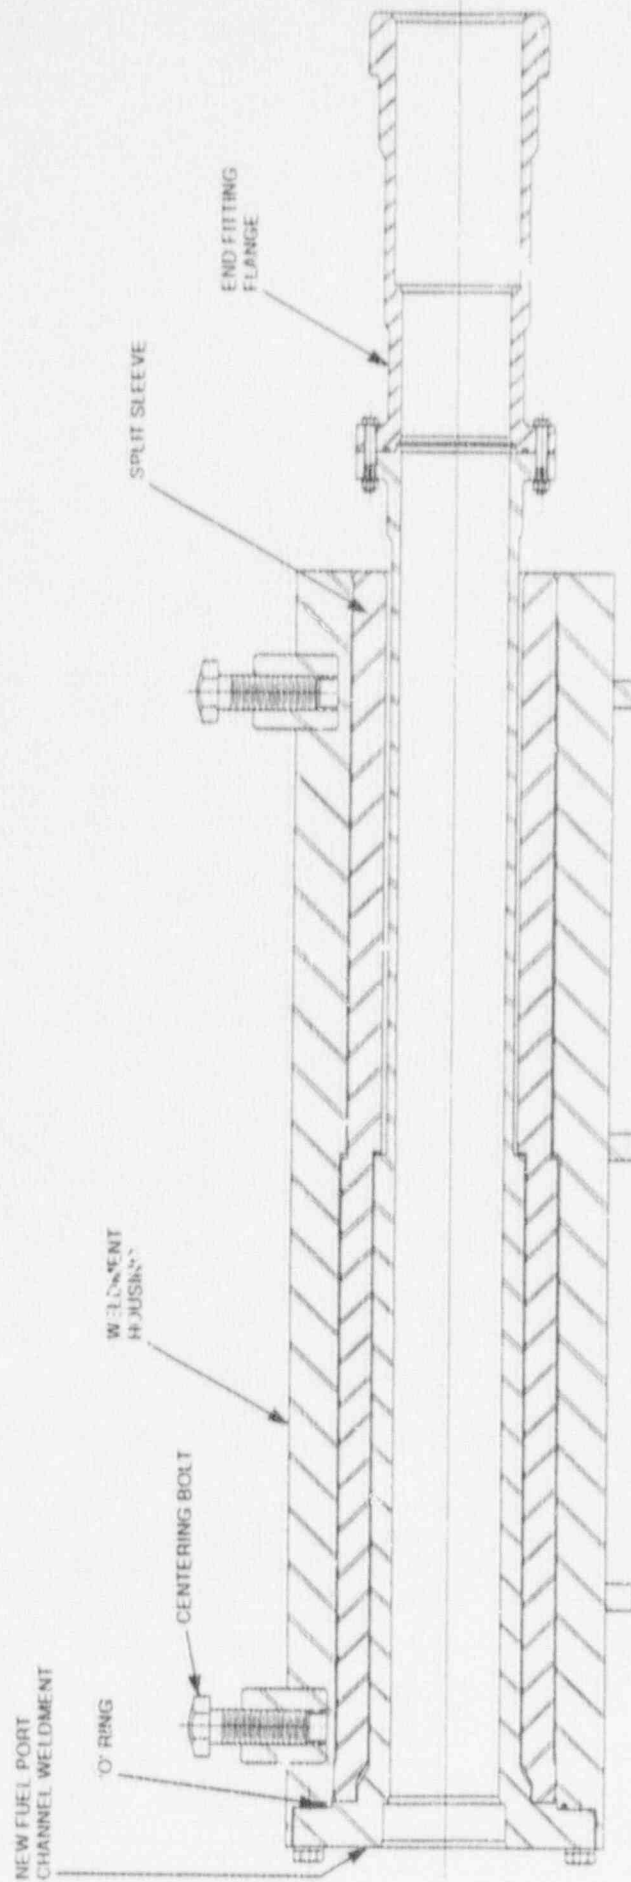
NEW FUEL PORT ASSEMBLY
